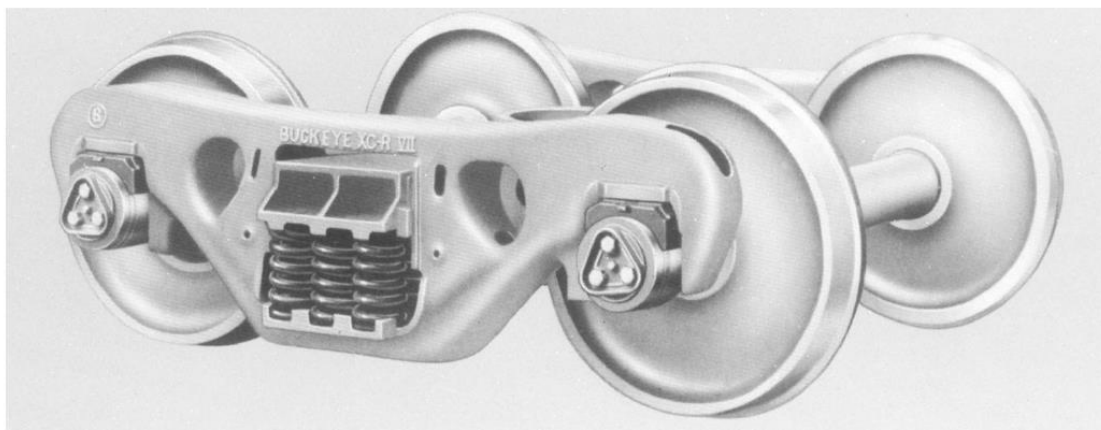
Parallel arrangement of springs in a freight truck. (Courtesy of Buckeye Steel Castings Company.)
